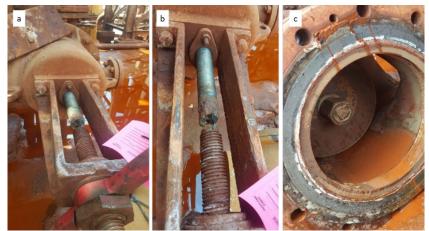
Broken stem in #3 DBO Pump Discharge Valve after removal (View #1) – see valve disc inside body in (c) photo at right
